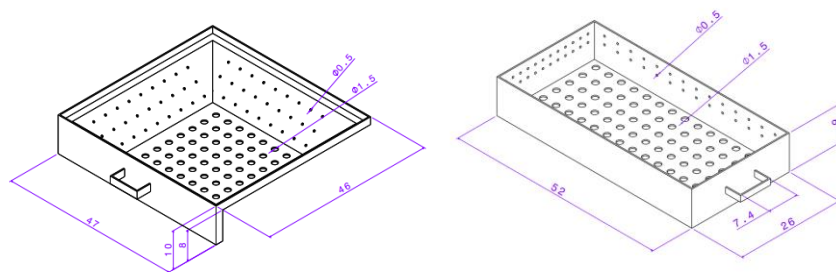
2 Isometric view of a)bottom combustion chamber b)upper cooking combustion chamber
